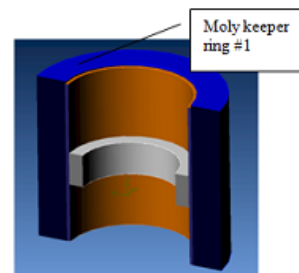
Cutaway view of the inner conductor sub-assembly braze. The moly keeper ring is removed for the next assembly.\..
